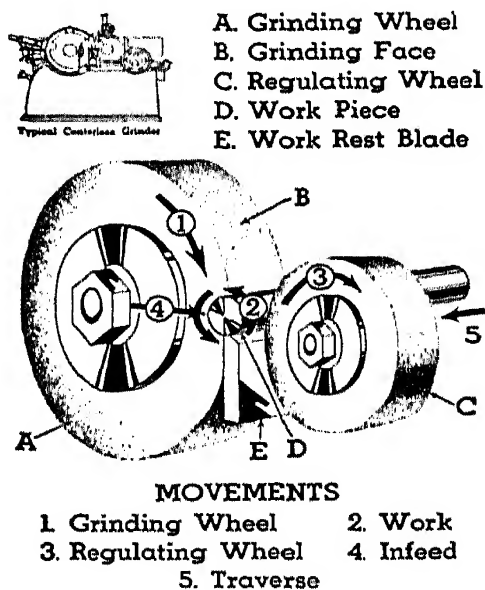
The action of an external cylindrical centerless grinding machine. (Courtesy The Carborundum Co.)
